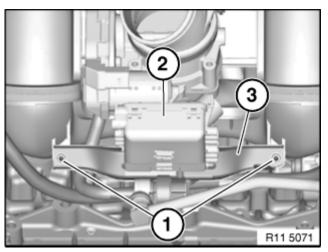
Identifying Cable Duct, Bracket, And Screws
